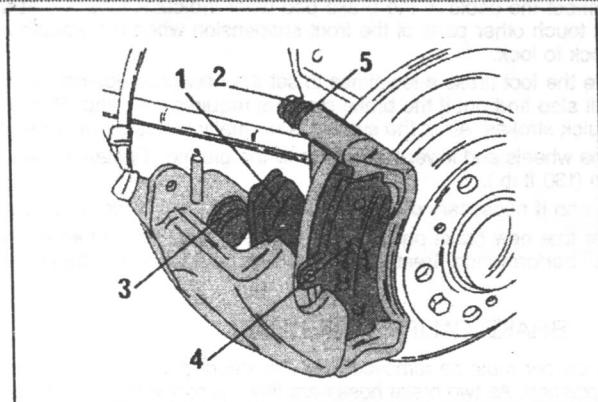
After removal of the upper bolt (see Fig. 8.3) swing the caliper downwards to expose the brake pads.
